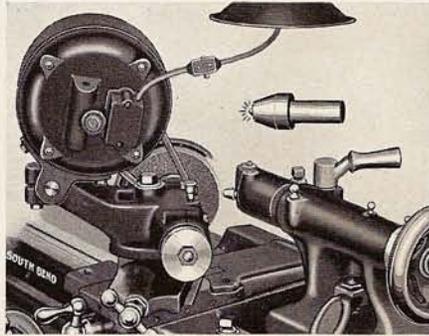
Truing a Grinding Wheel using Tailstock Diamond Holding Fixture.
